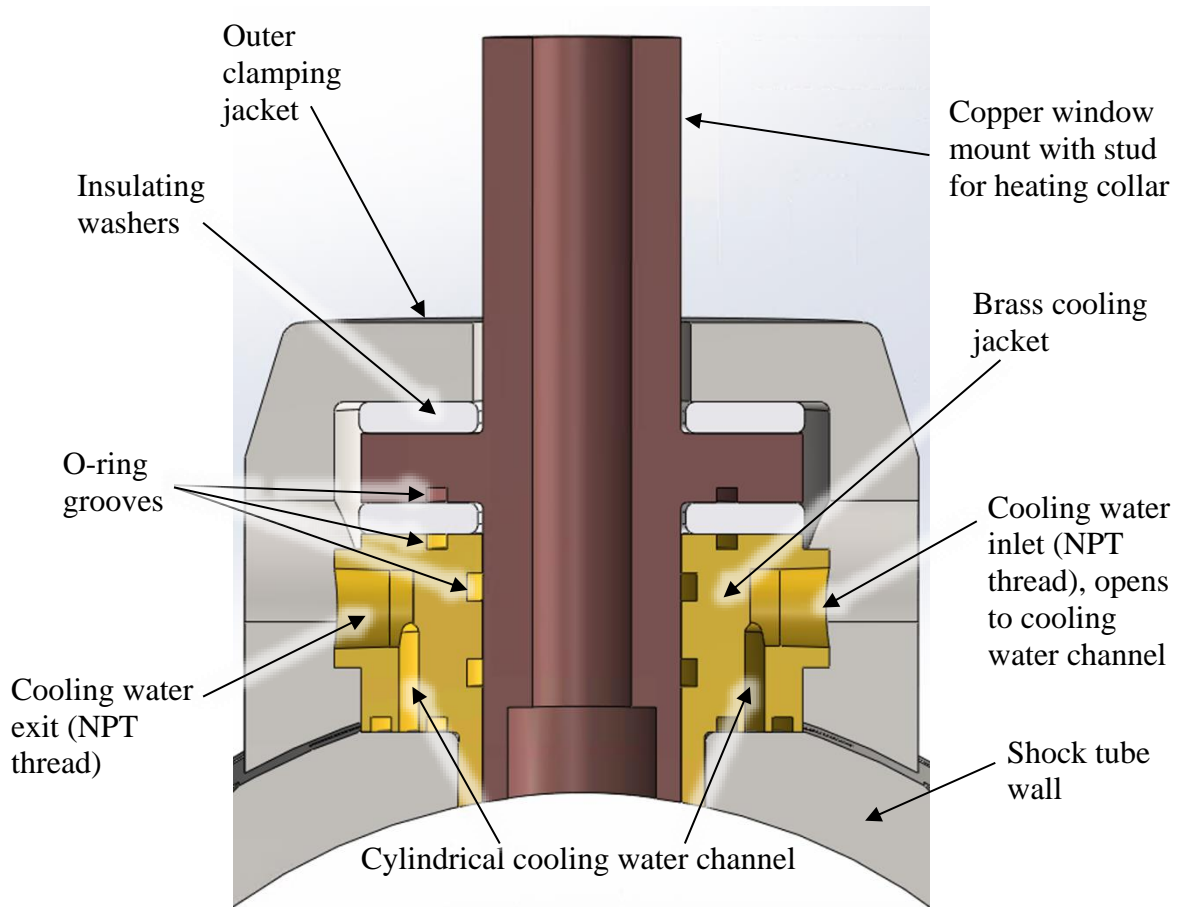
Section view of the cylindrically shaped heated window port assembly mounted on the shock tube.
